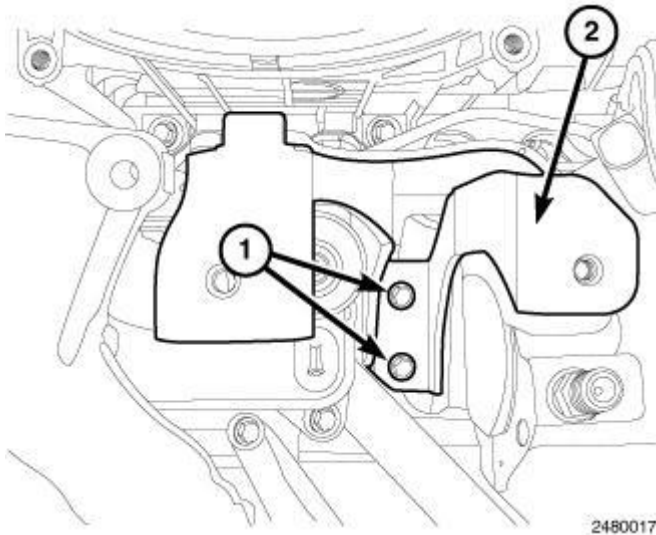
EGR Vacuum Solenoid & Bolts
